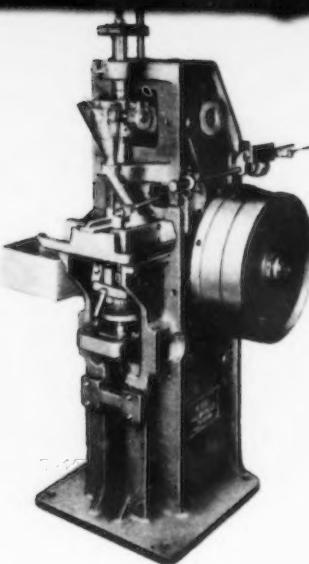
A 10-ton belt drive model selling for less than \$2000. Photo courtesy Kux Machine Co.
